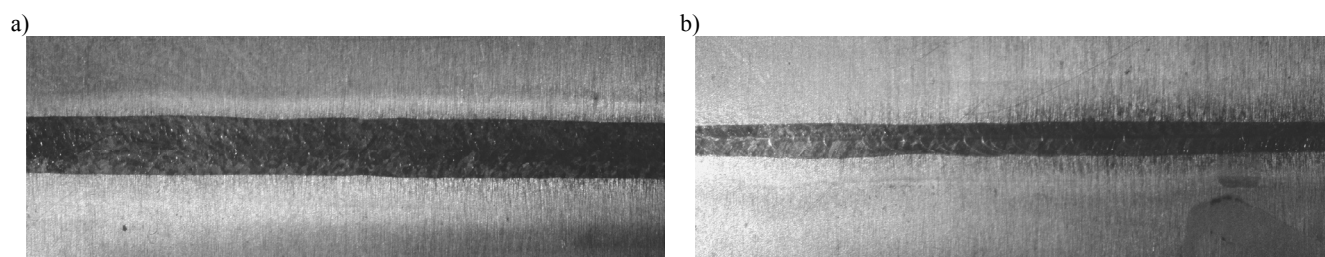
A view of butt joints of titanium alloy Ti6Al4V sheets 1.5 mm thick laser welded with the HPDL laser, weld no. 1 (P1) (Table 5); a) weld face, b) weld root
